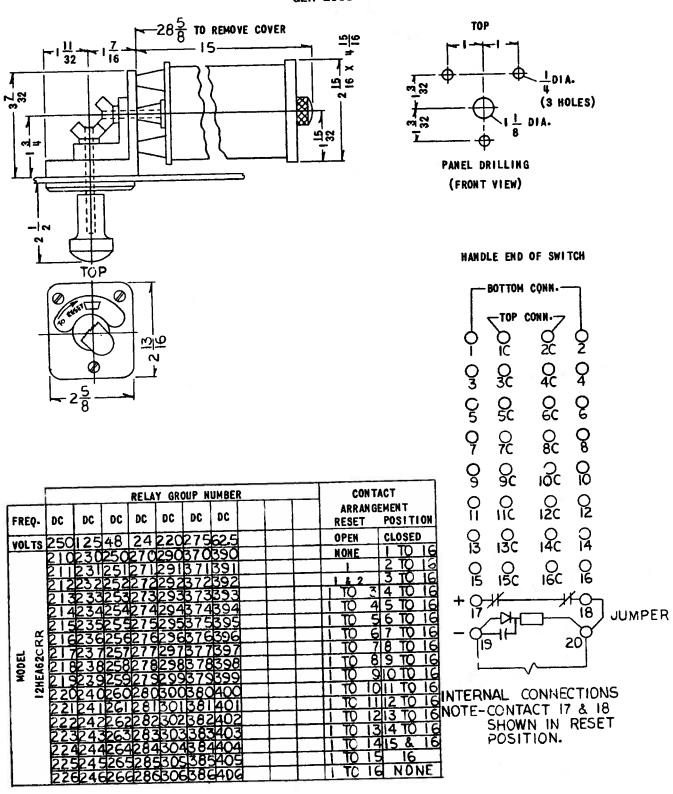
C (0246A2253-1) Outline, Panel Drilling and Internal Connections for Relay HEA62CRR
